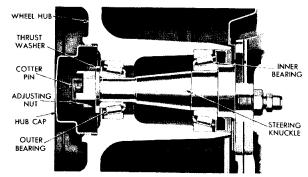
Sectional View of Typical Front Wheel Assembly (B-4-B, B-4-C, B-4-DU)
